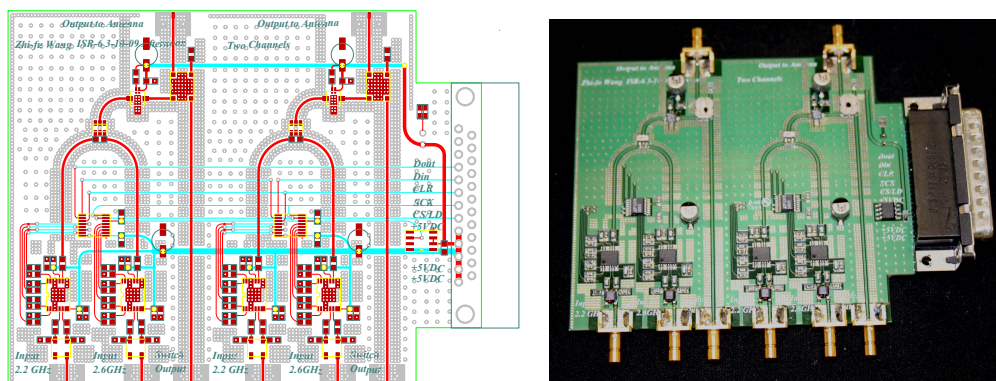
PCB Artist layout of 2-channel RF modulator (left), photo of the board (right).
